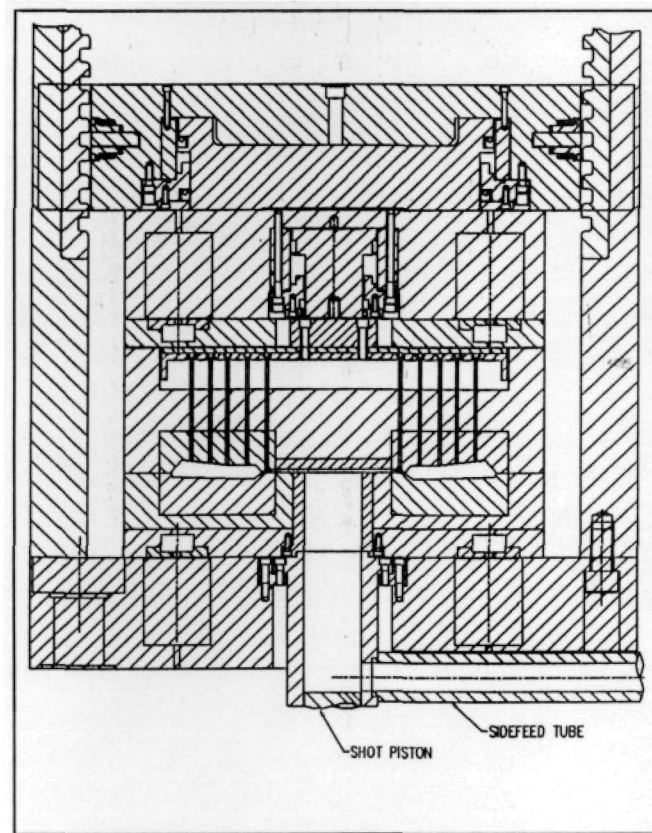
Schematic of THT Presses vertical die casting machine. From [30].
